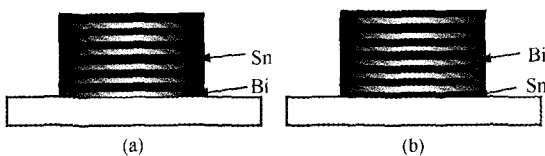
Schematic diagrams of solder bumps formed with different sequence of solder layers deposition. (a) Bi-Sn solder bump with Bi bottom layer. (b) Bi-Sn solder bump with Sn bottom layer.
